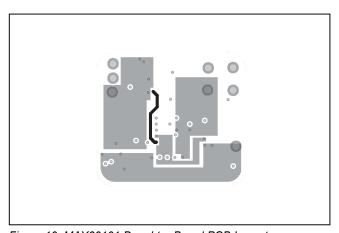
MAX30101 Daughter Board PCB Layout—Component Side
